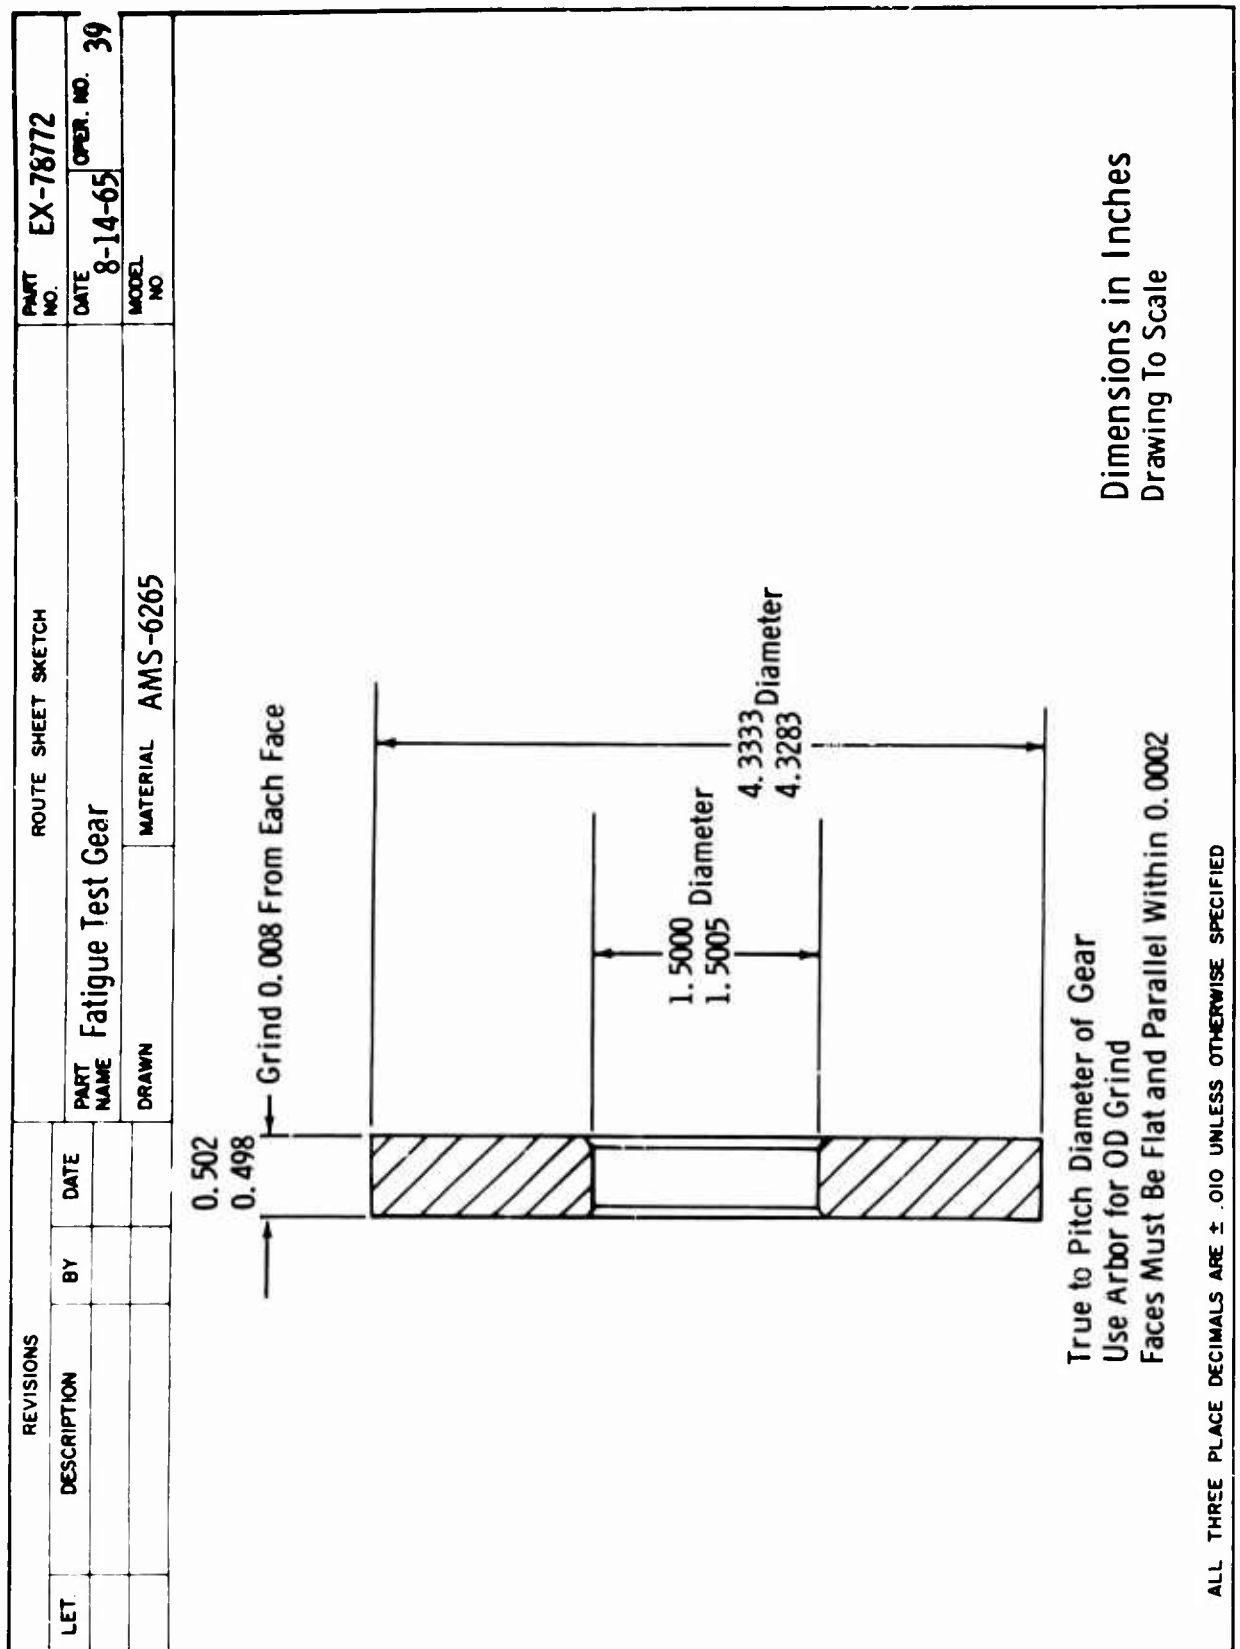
Typical Routing Sheet for Full Form Ground Fillet Gear, EX-78772 (Sheet 9 of 9).
